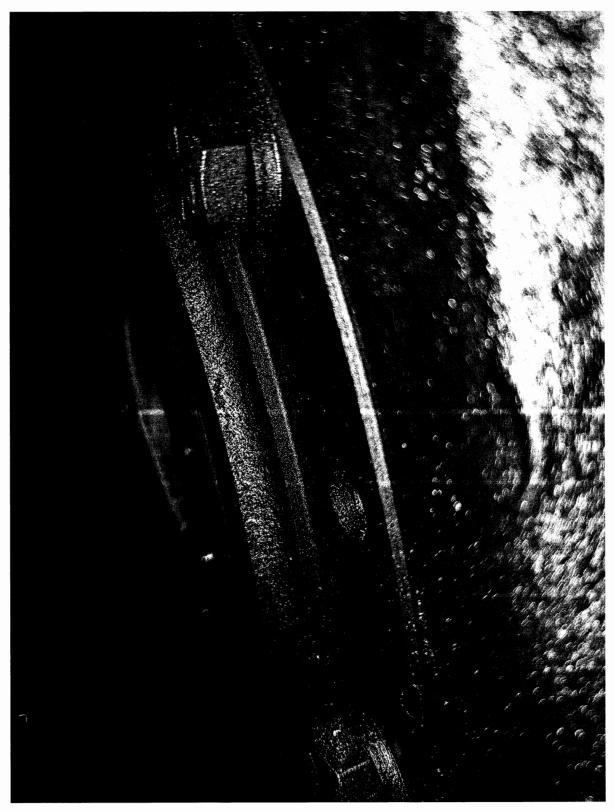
Rear Main Seal – View from Right-Bank Side
